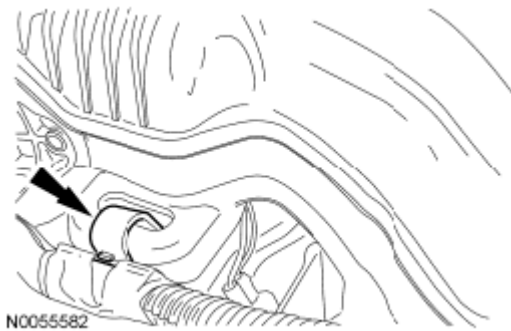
Locating Block Heater Wiring Harness Retainer & Upper Intake Manifold
